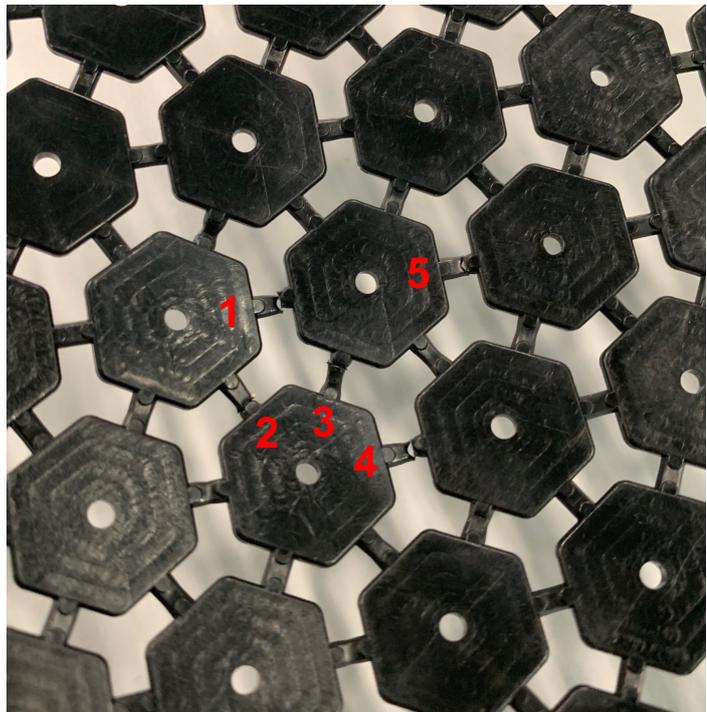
Five hinge fractures in Isoblox X layer after testing on sample GAXDZ
